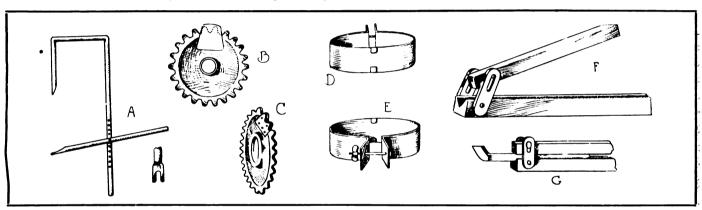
Useful Tools for the Repair Shop: A, Easily Constructed Valve Lifter; B and C, Method of Replacing Broken Teeth in Fibre Gear; D and E, Piston Ring Holder; F, Morgan Tool Holder; G, Holding a Diamond Point Tool.
